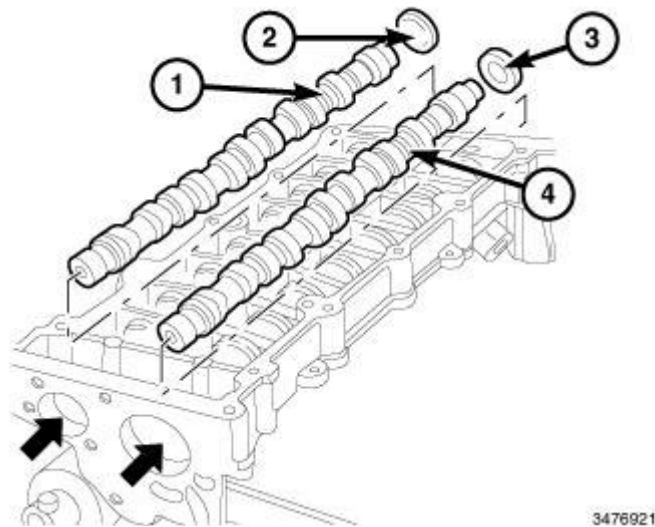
Intake Camshaft, Plug, Exhaust Camshaft & Oil Seal
